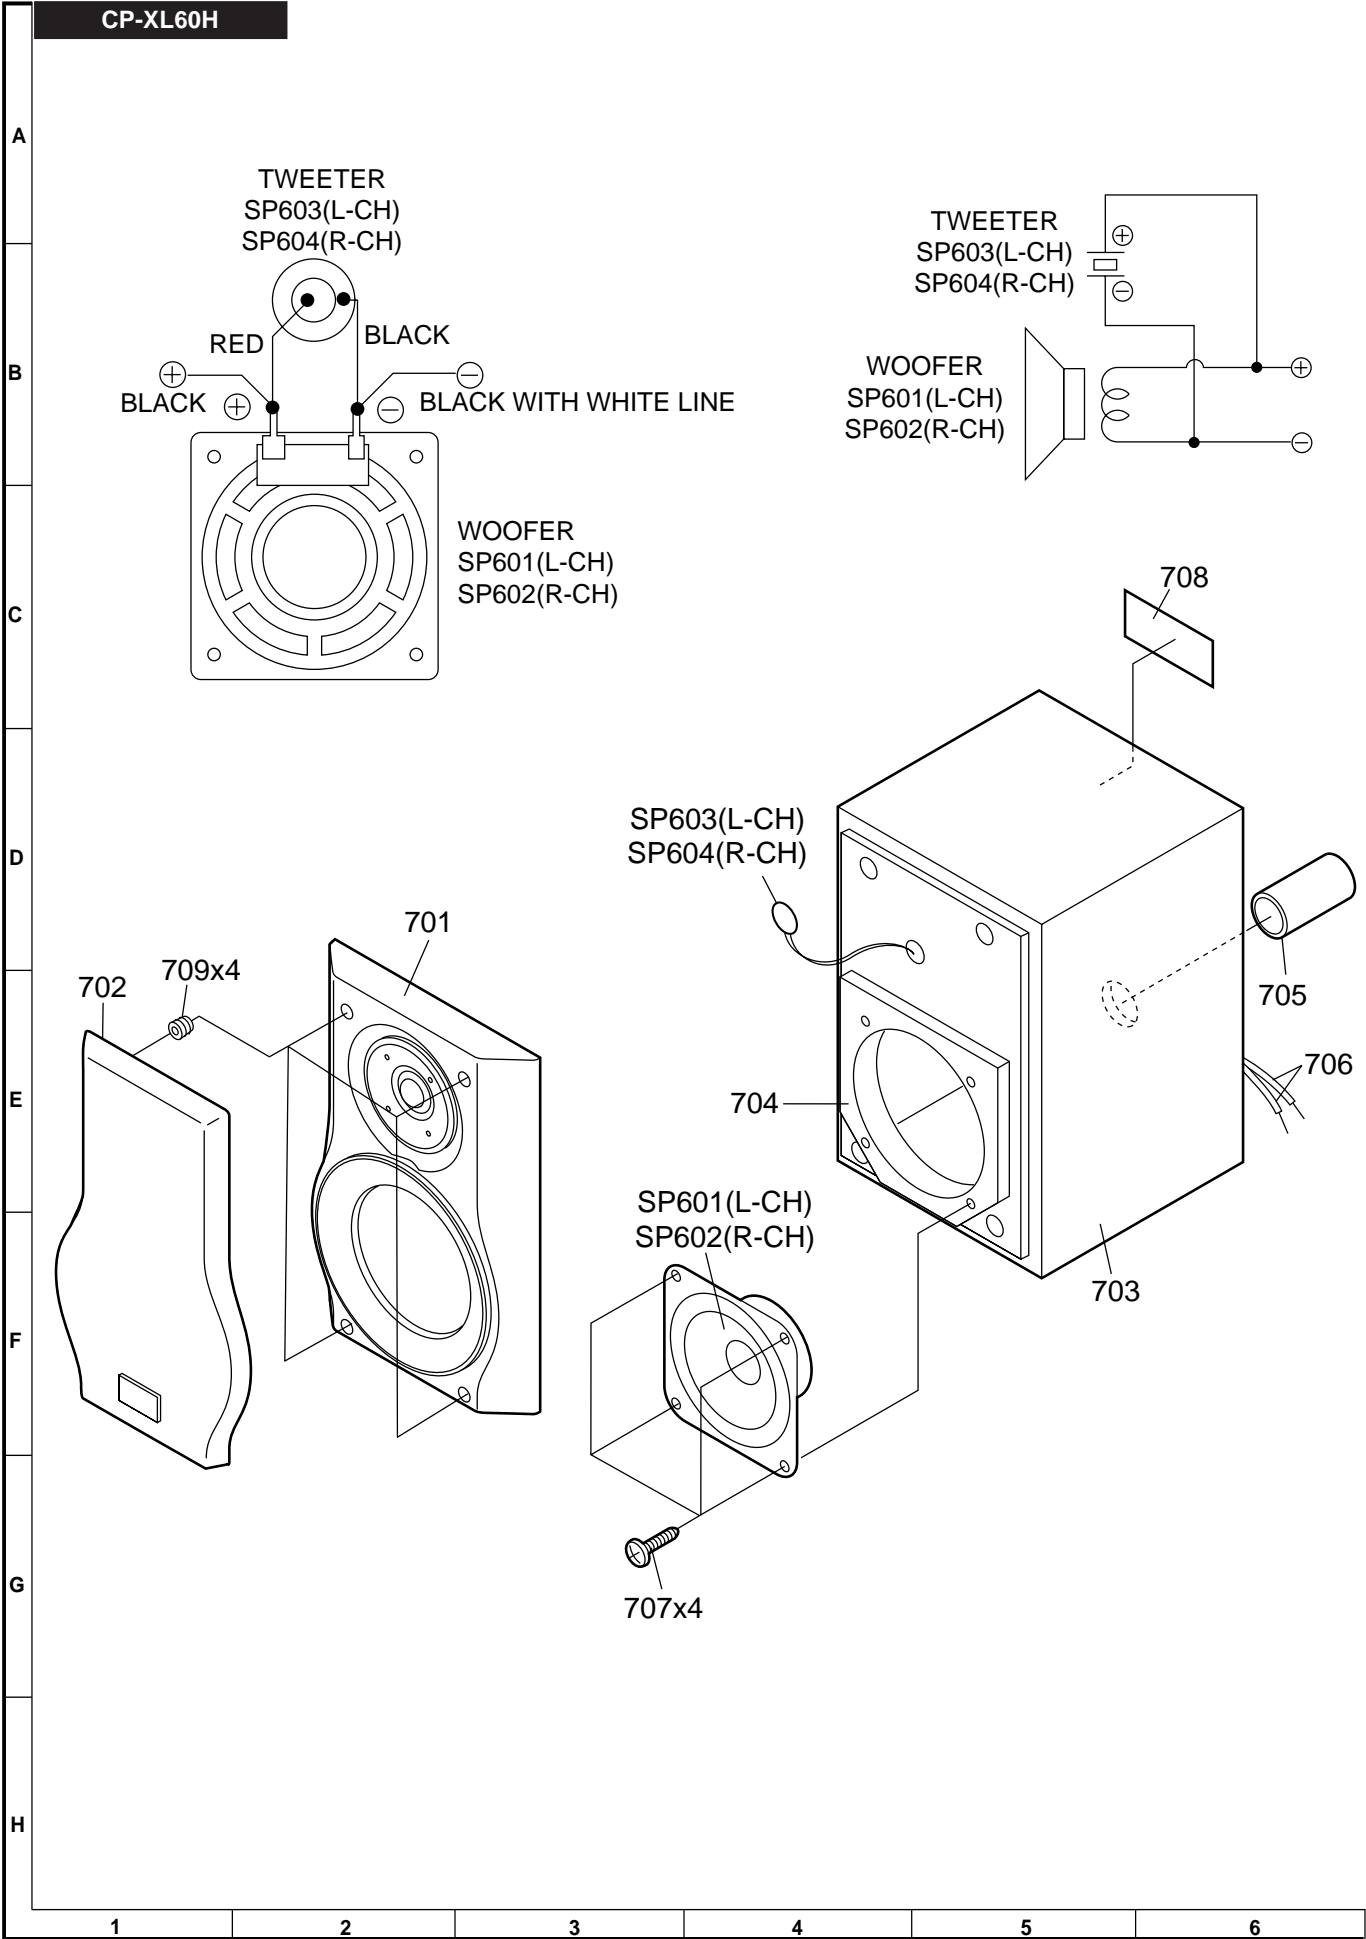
SPEAKER EXPLODED VIEW (1/2)
